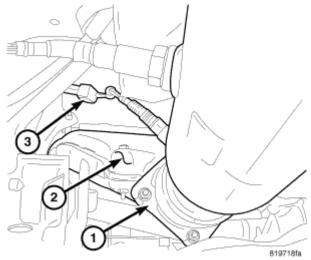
CAT AT EXHAUST MANIFOLD Courtesy of CHRYSLER LLC
